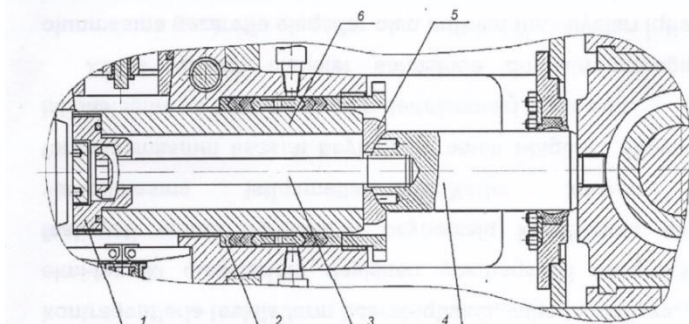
The main parts of the oil field pump plunger unit 1-plunger; 2-crosshead; 3-stock; 4-washer; 5-thrust; 6-plug; 7-crosshead pad; 8-clamping nut.
